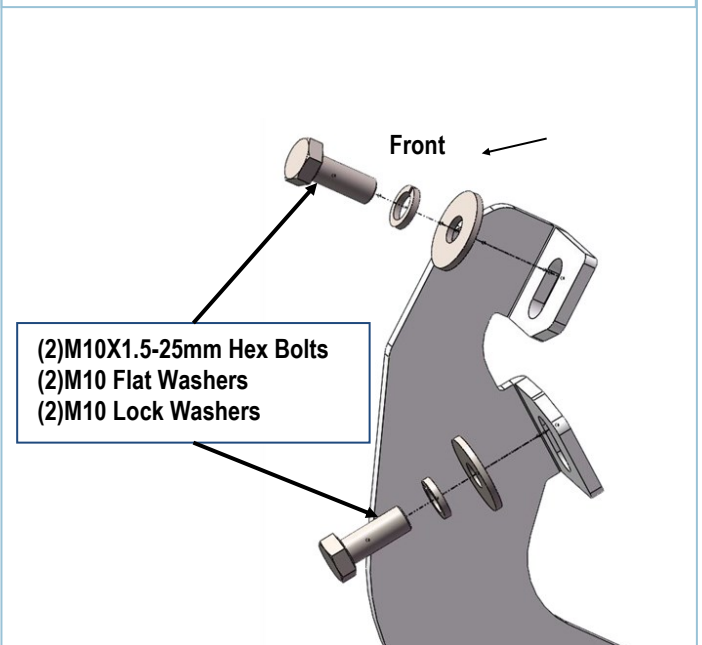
Passenger Front Mounting Bracket (PFM) Installed
